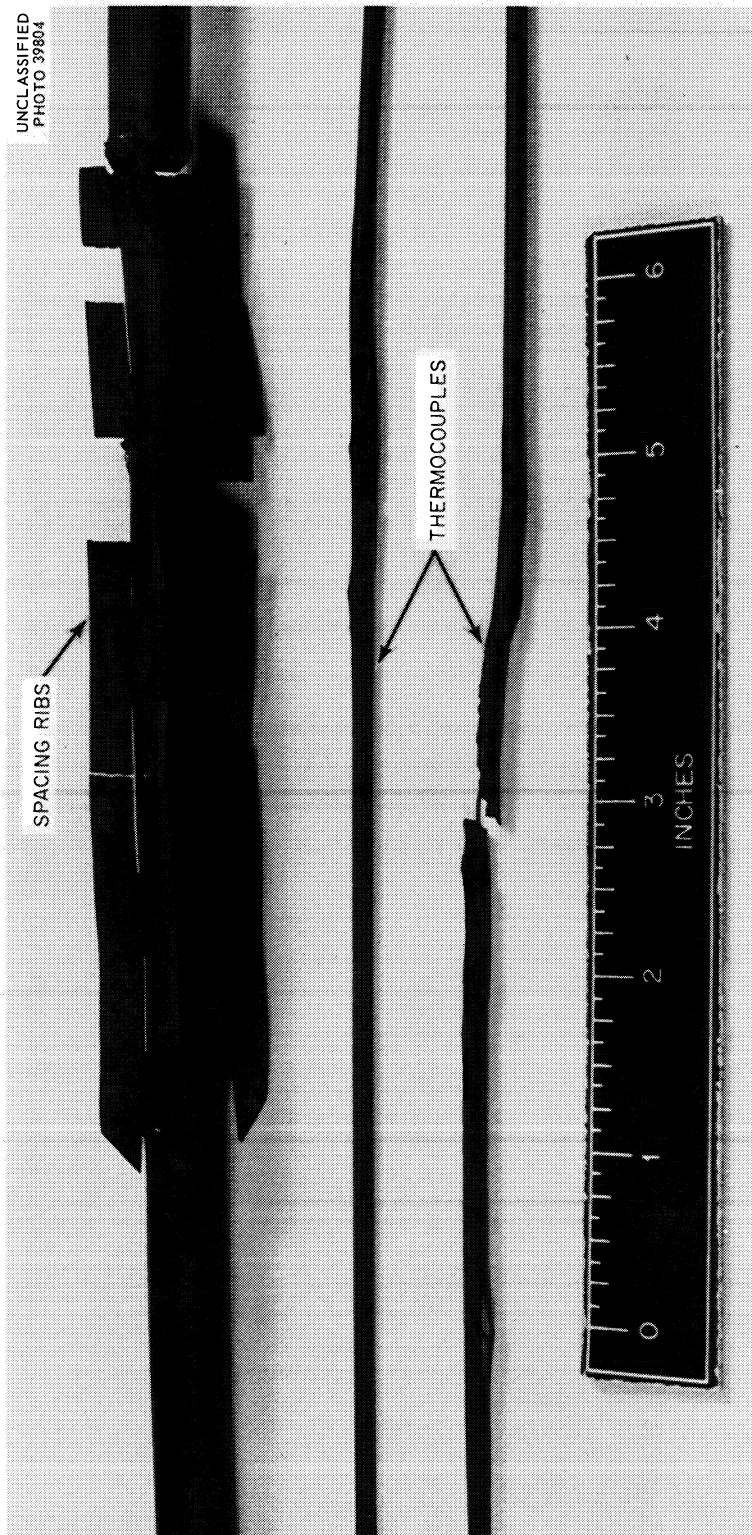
Failure of 1/2-in. Water Inlet Tube at 38-in. Elevation.
